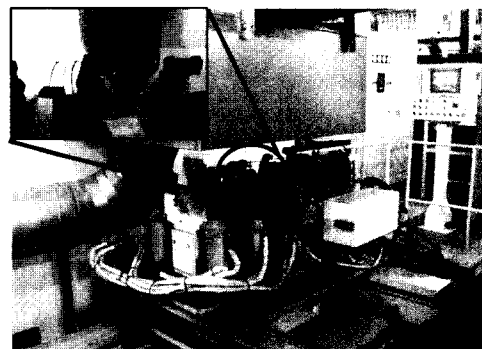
CO<sub>2</sub> laser remote welding system
